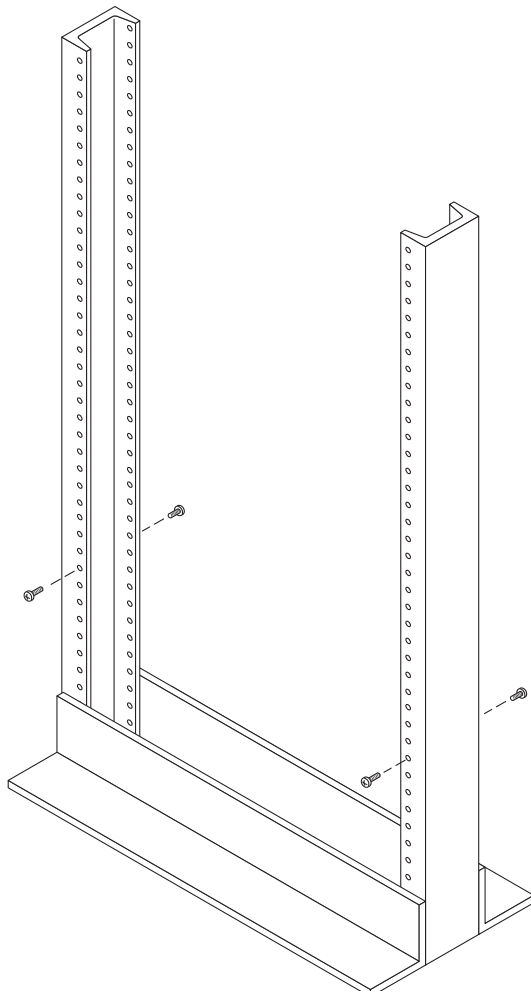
Inserting Screws in the Front and Back Mounting Holes of the Telco 2-Post Rack
